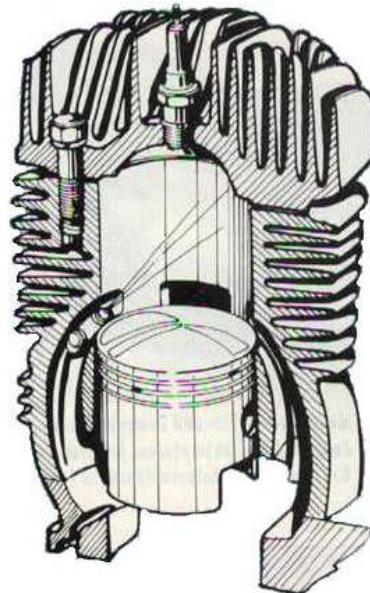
Sectional drawing of the Motobecane 125 cm³ single cylinder [88, p. 427]
